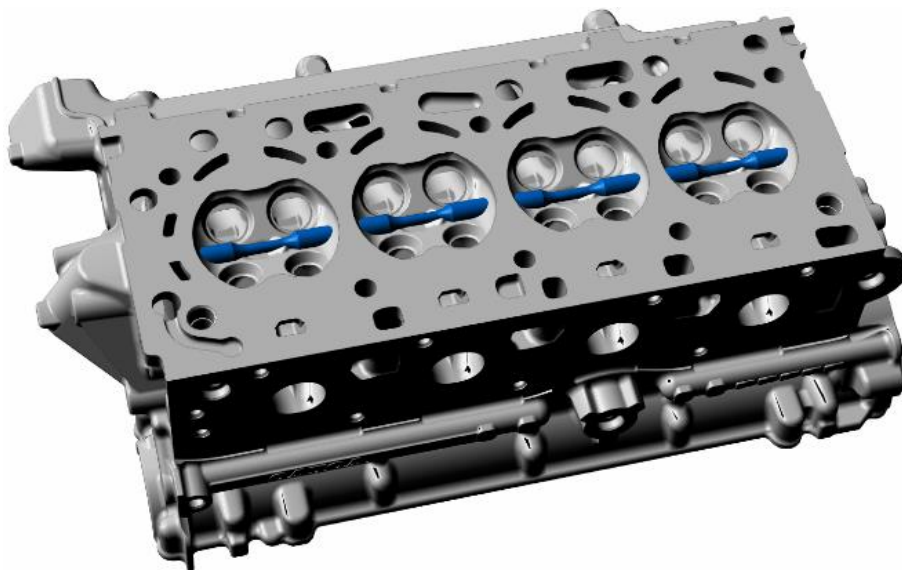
3D CAD rendering indicating the specimen extraction zones.
